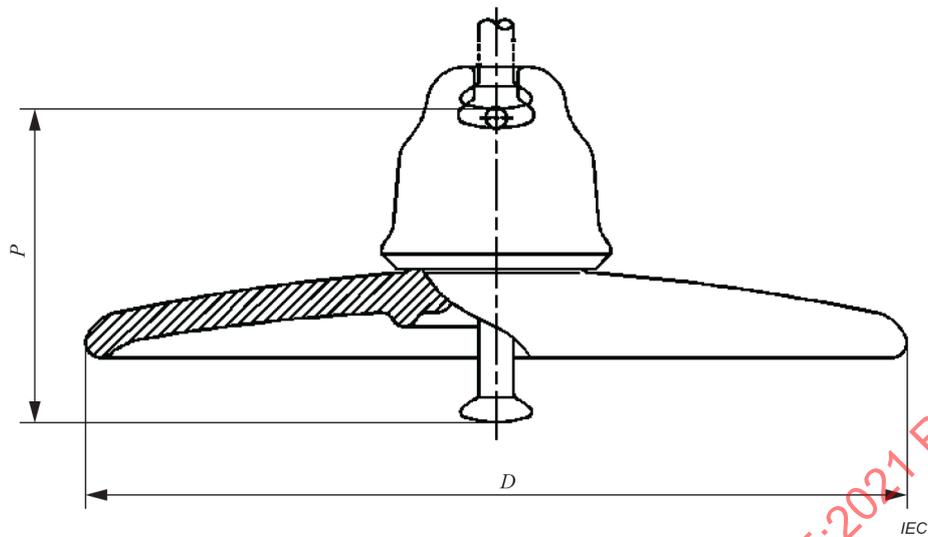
String insulator unit of aerodynamic profile with ball and socket coupling
